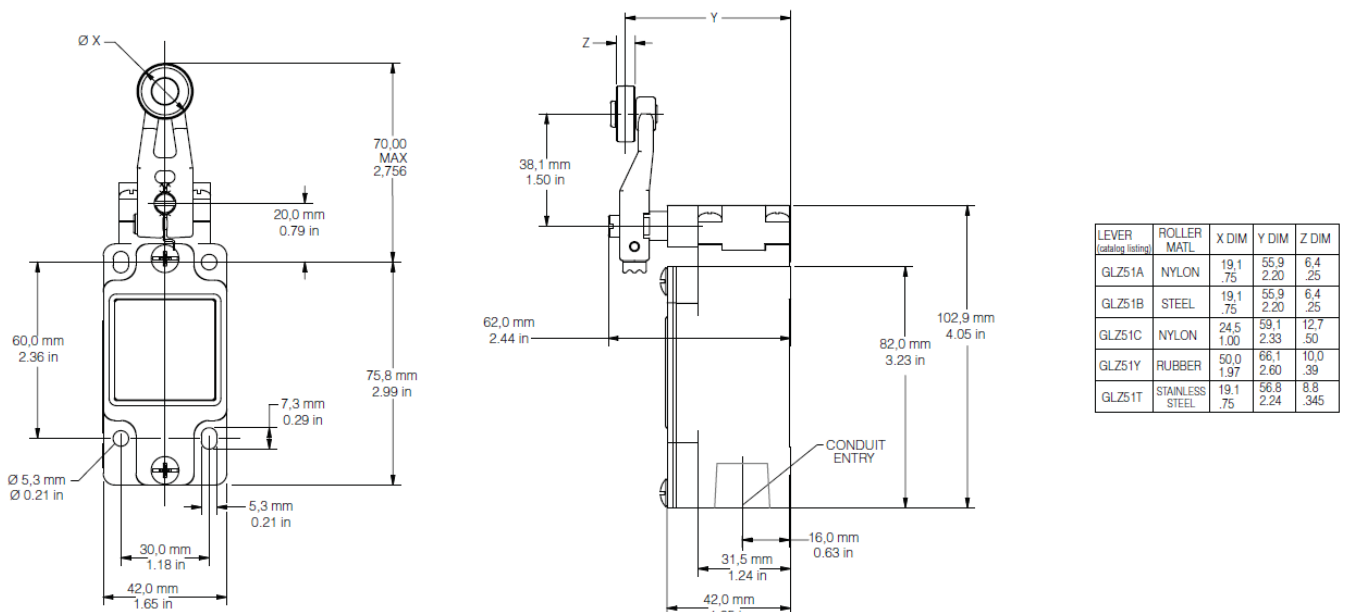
Fixed Lever, Side Rotary Switch – Plug-in Body Style, GLZ51 lever, and GLB body
